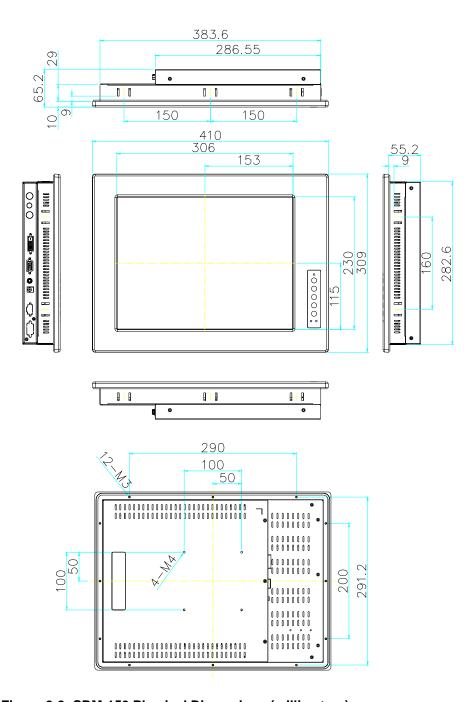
SRM-150 Physical Dimensions (millimeters)
